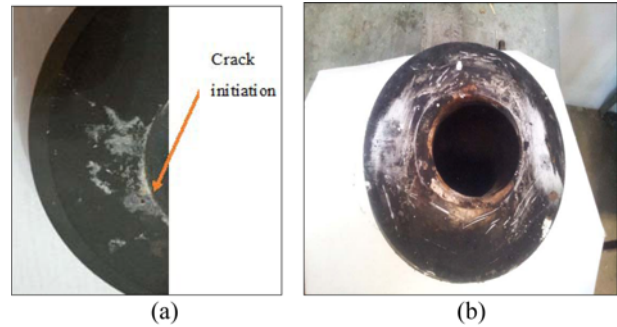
(a) Piston head damages: puncture and crack initiation; (b) Punctures in upper surfaces around the cavity.
